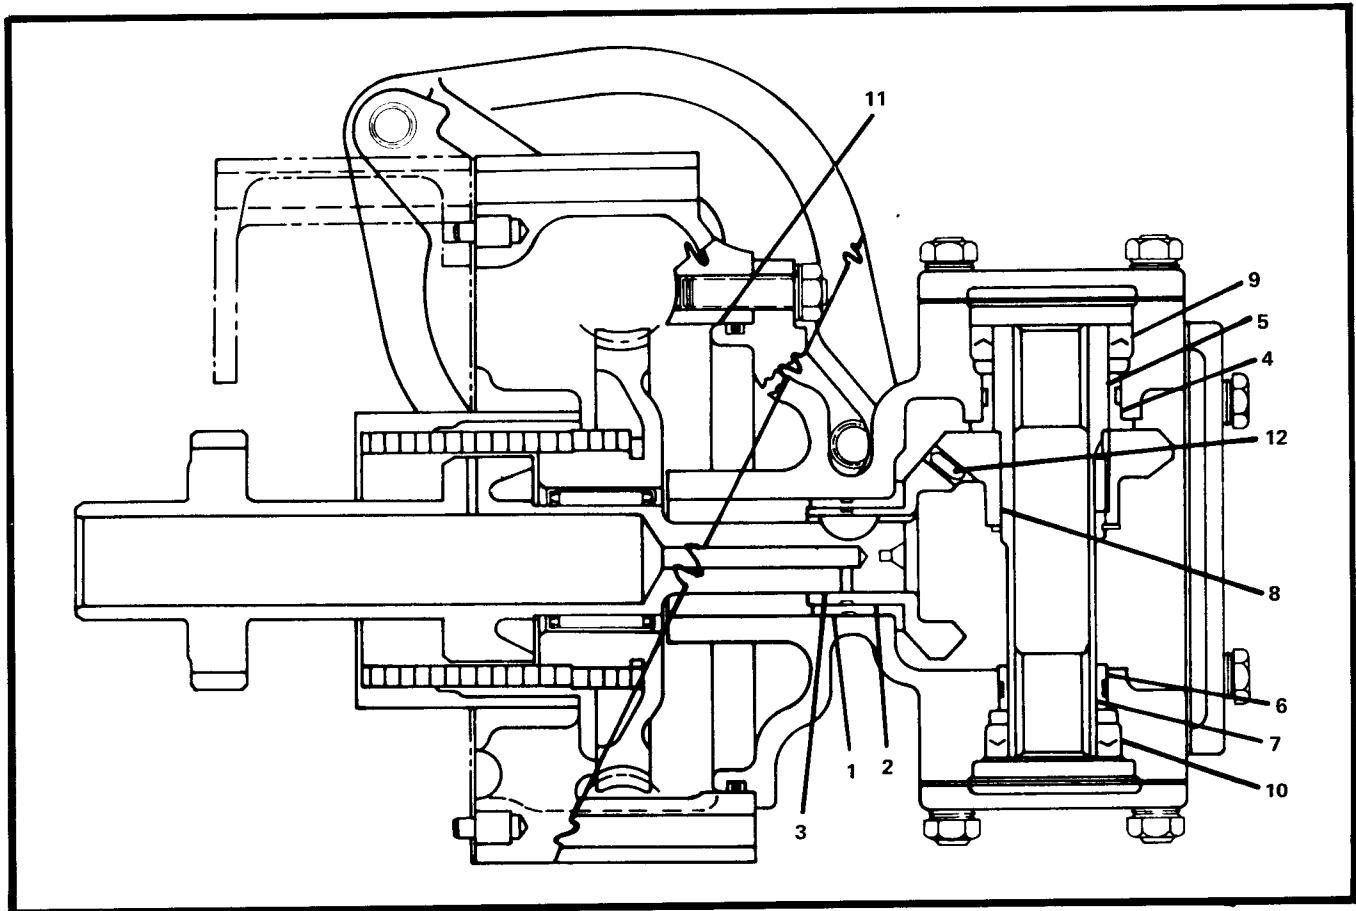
Starter Adapter & Accessory Drive Limits (IO-360C & G) (Refer to Table VIII).
